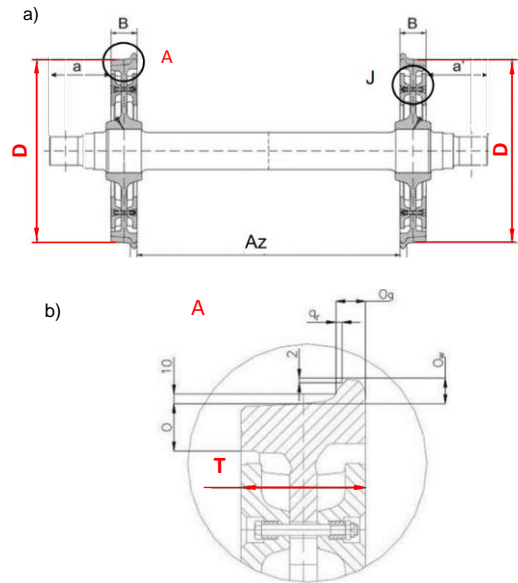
Cross-section of: a) rolling wheel set with dimension D , b) detail A of the wheel rim with brake disc and dimension T [4]
